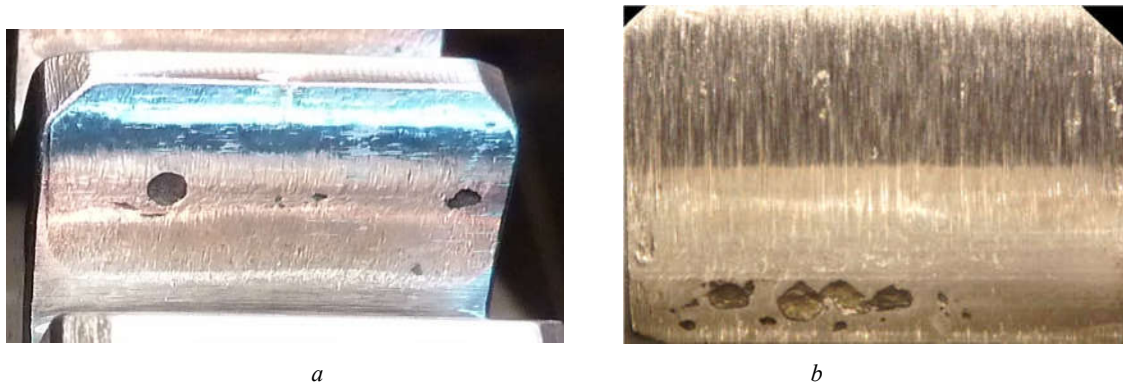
Pitting: *a* – non-standard gearing HCR¹⁰, $\epsilon_\alpha = 2,003$; *b* – C-C gearing, $\epsilon_\alpha = 1,116$
